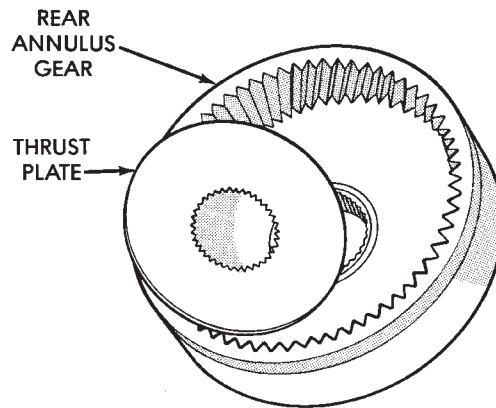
Rear Annulus Thrust Plate Removal (46RH)
